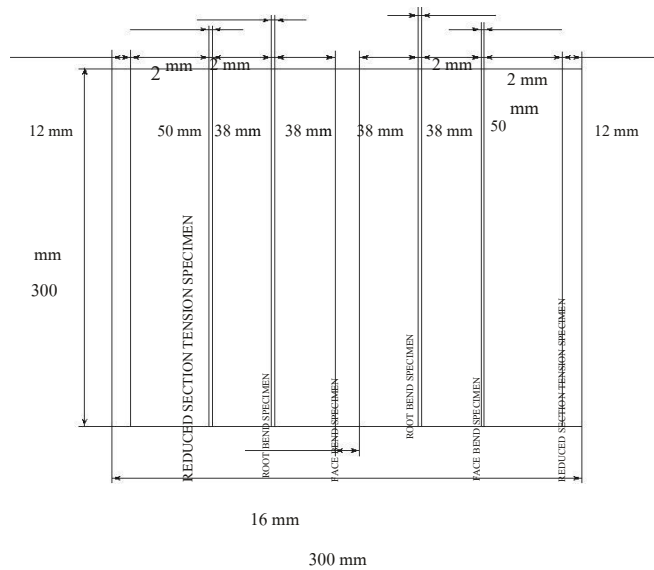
Specimens from welded plates [AWS - D1.2]
